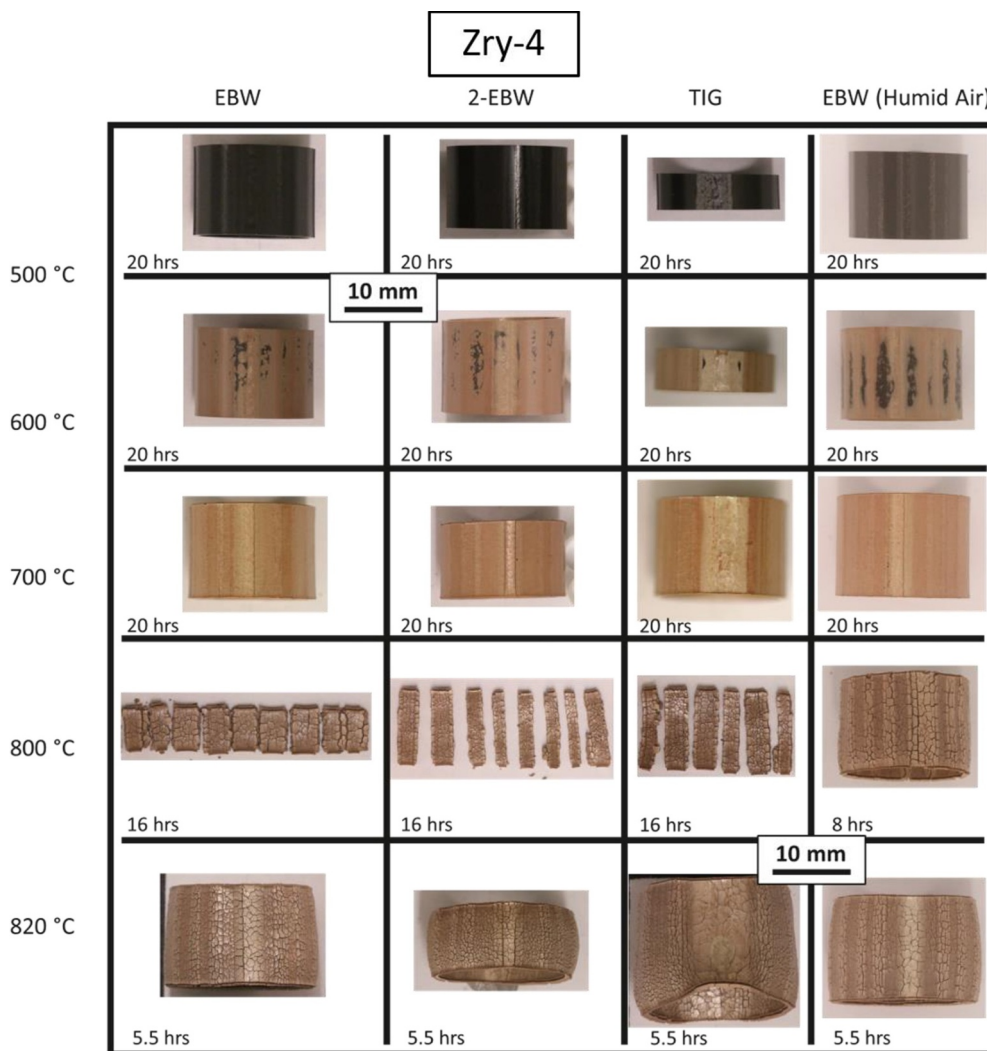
Macroscopic images of Zry-4 EBW or TIG welded tubes after isothermal oxidation experiments in dry or humid air with the weld facing forward.
